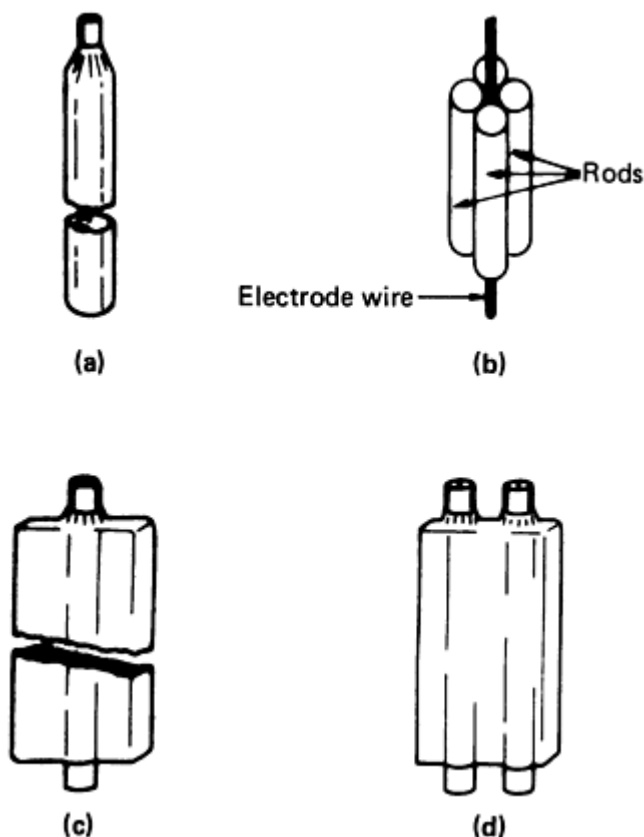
SELECTED ELECTRODES AND GUIDES (NOZZLES) USED IN ELECTROSLAG WELDING. (A) SINGLE FLUX-COVERED TUBE. (B) CLUSTER OF RODS TAPED TOGETHER. (C) FLUX-COVERED WING NOZZLE. (D) FLUX-COVERED WING OR WEB NOZZLE WITH TWO TUBES
